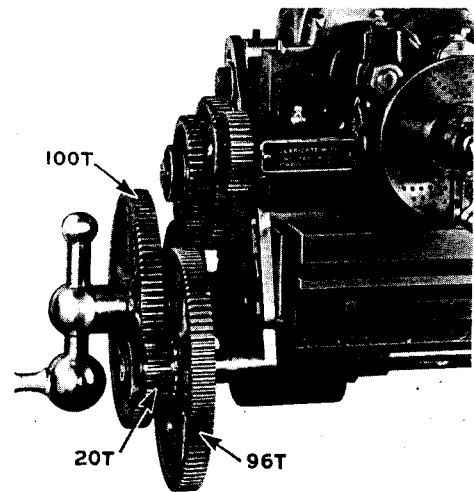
No. 0 Short Lead and Feed Reducing Attachment.
